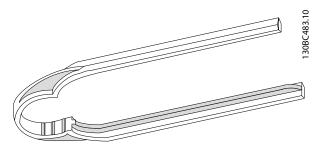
Installation Tool for Threaded Cable Connectors
